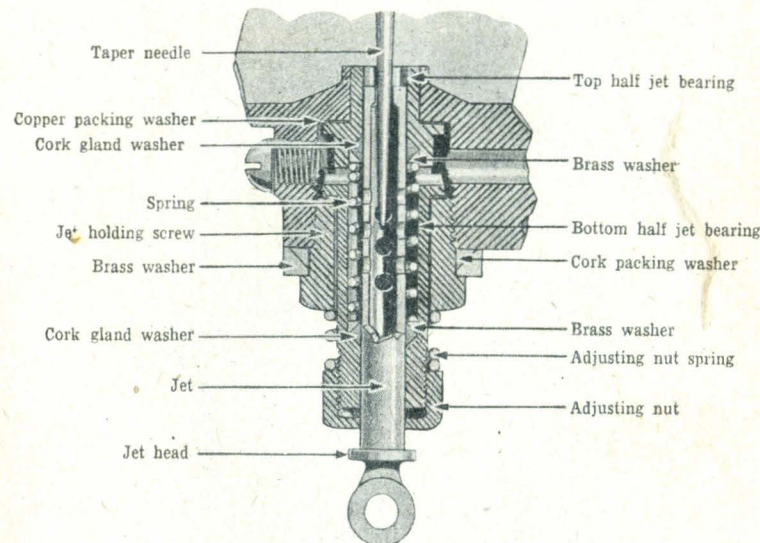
AN ENLARGED SECTION OF THE JET ASSEMBLY
